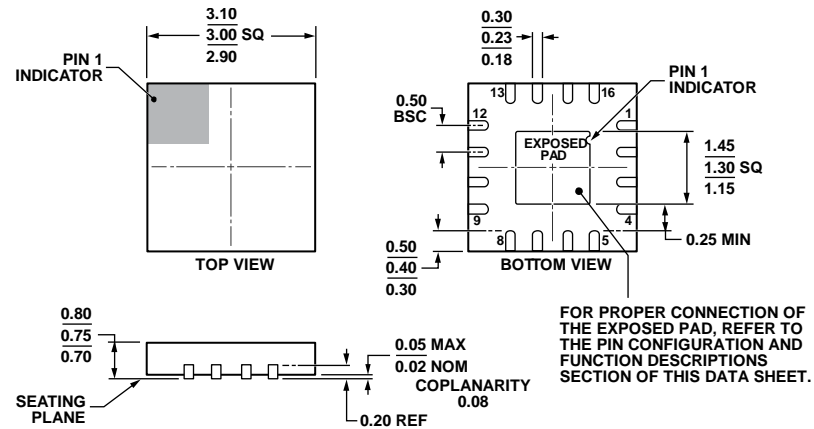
16-Lead Lead Frame Chip Scale Package [LFCSP]
